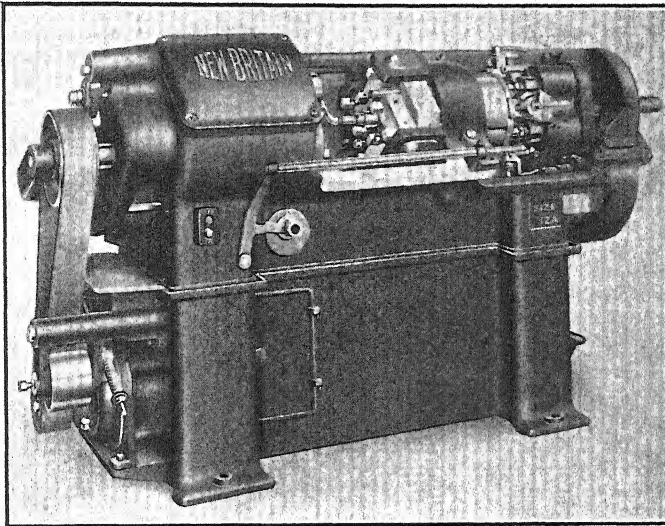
The New Britain No. 12A Automatic Chucking Machine Used for the Rapid Production of Small Parts.
